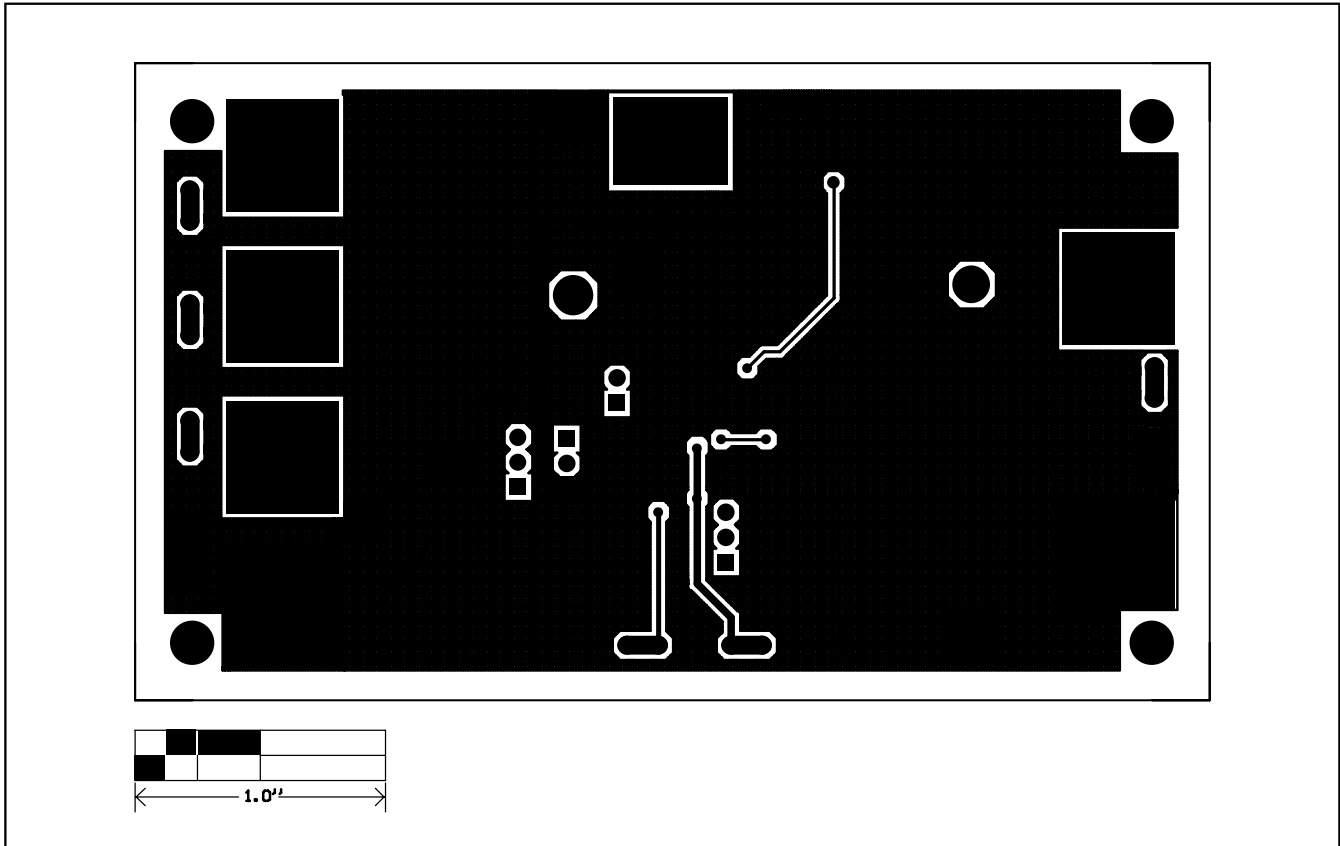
MAX6397 EV Kit PC Board Layout—Solder Side
